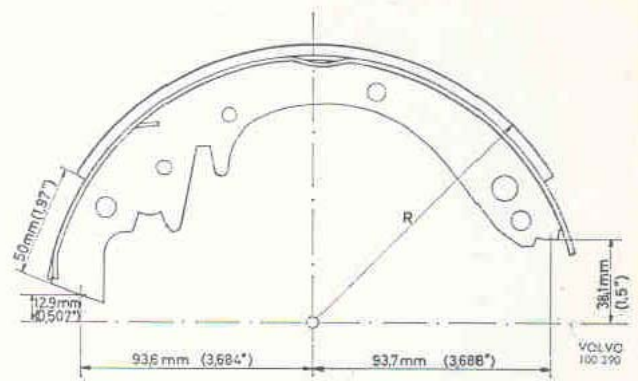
Adjusting measurements for rear wheel rear brake shoes.
